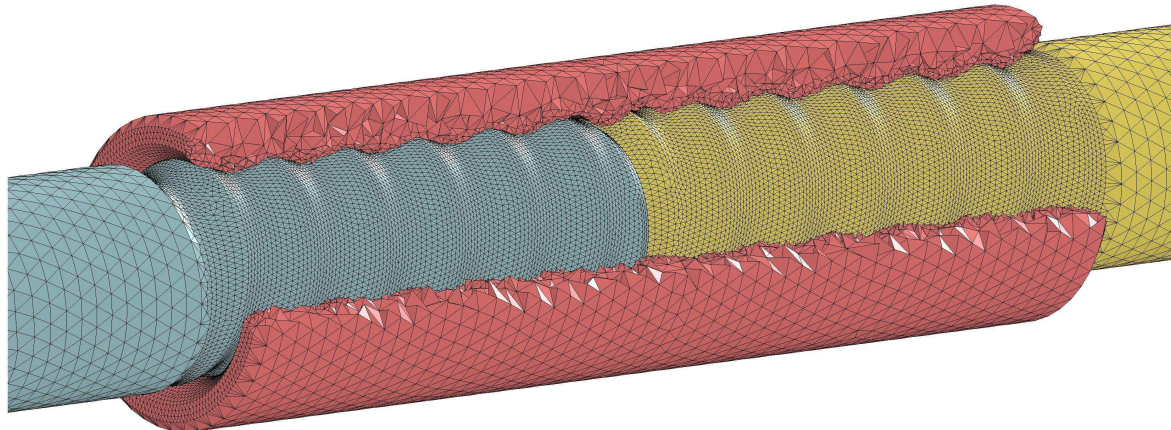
Drill rod joint with a sector of the coupling sleeve removed.
